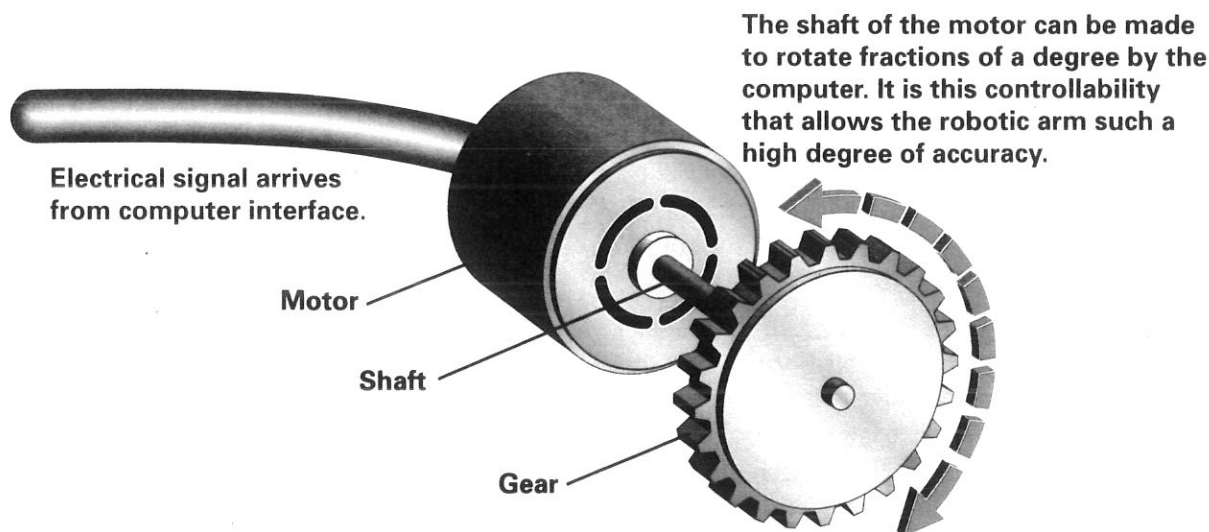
Stepper motors provide the force to move the robotic arm. Gear trains and chain drives transfer mechanical energy from the motor to the moving part of the robotic arm. Gears are used to adjust the speed of the motors.
